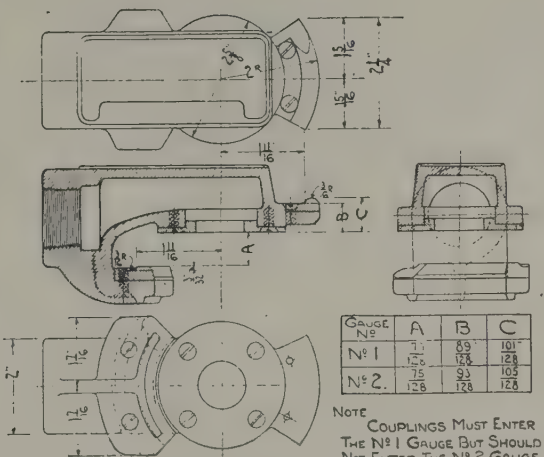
Recommended Practice for Gage for Air Brake Couplings. (M. C. B. Sheet Q.)
